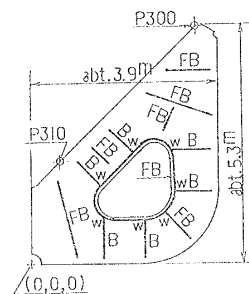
A hull sub-assembly to be welded by Robot
